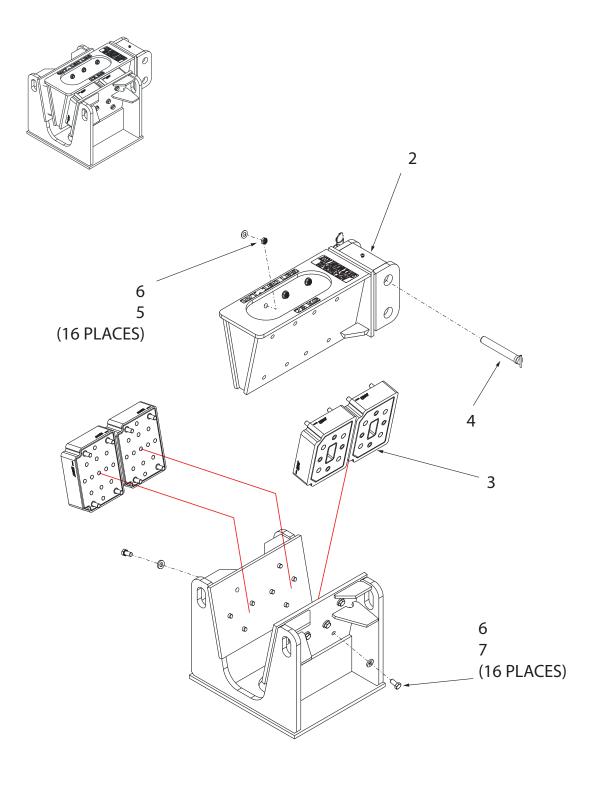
AGSE-E16620-S01 Optional Shock Mount Assembly
